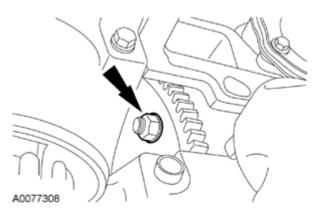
Locating Torque Converter Nut Courtesy of FORD MOTOR CO.
